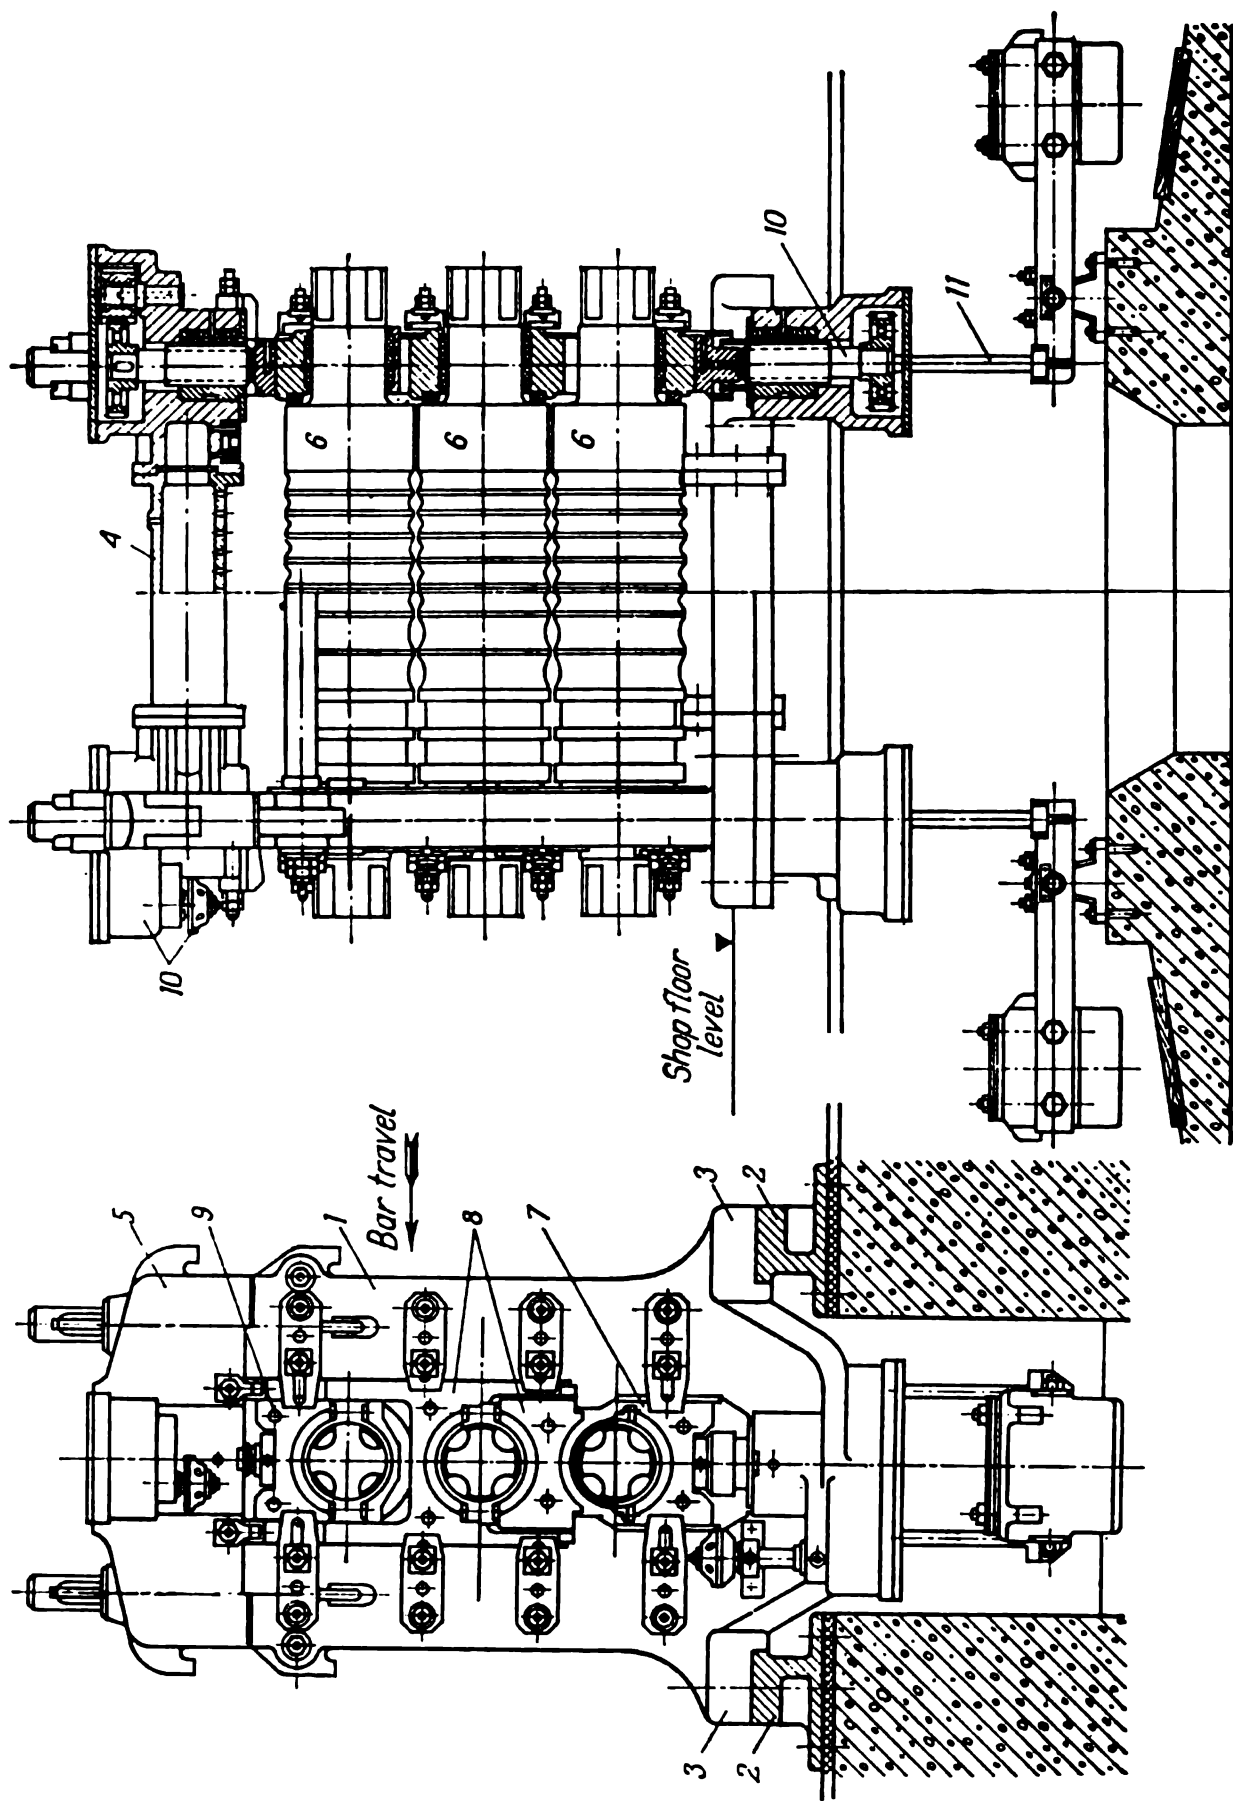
500-mm three-high roll stand of a heavy-section mill (of Soviet design)
